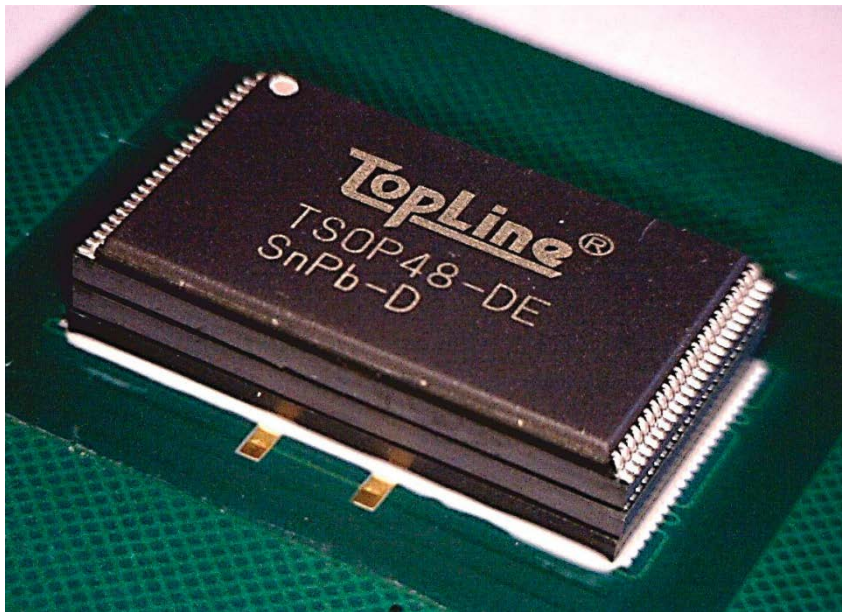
Photograph of 4-high stacked package surface-mounted assembly with underfill.
